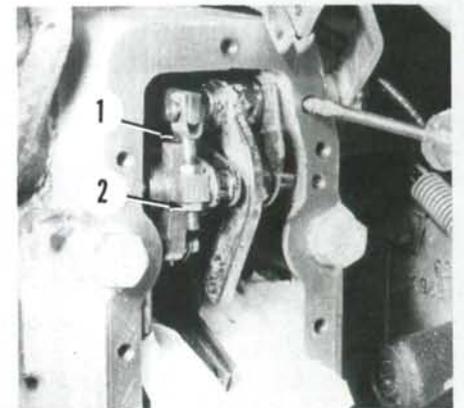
Remove cover from rear of right-hand rockshaft bracket to gain access to draft link adjuster (1) and adjusting nuts (2) on Model 1594.
